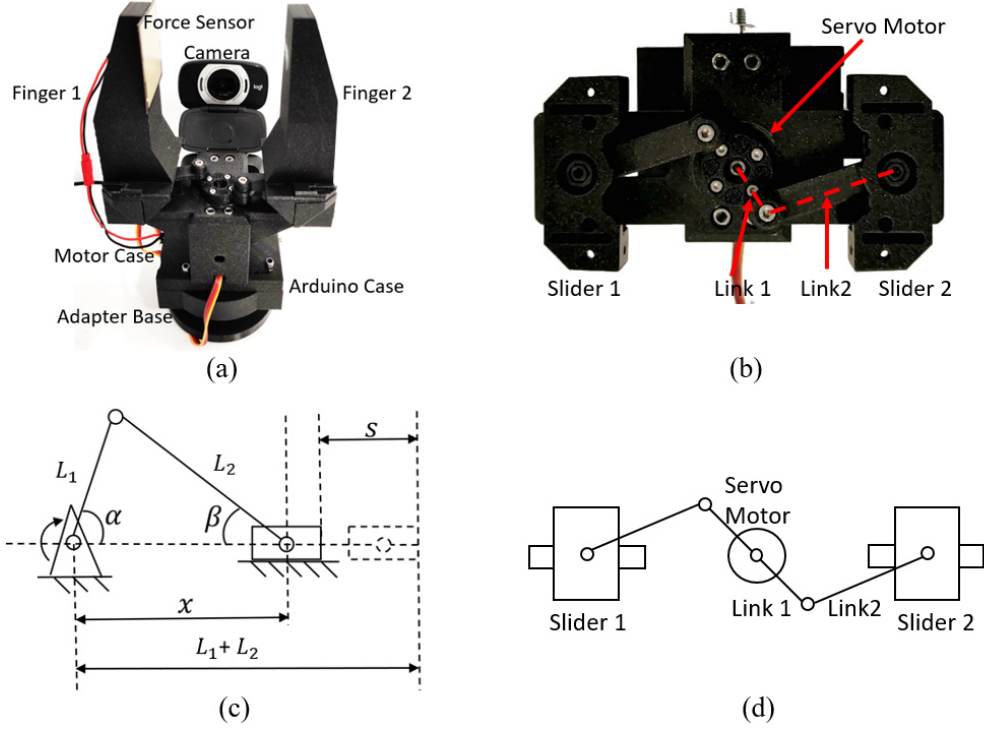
The overall gripper structure and parallel mechanism design. (a) The two fingers of the gripper are mounted on linear slider 1 and slider 2, which are driven by a servo motor. (b) The corresponding view of the slider-crank mechanism with fingers removed. (c) Diagram showing the geometric layout of the slider pin, link pin and motor shaft. The length of the crank is L_1 , the length of the link connecting the finger and crank is L_2 , the motor angle is α and the slider angle is β . (d) Sketch of the in-line slider-crank linkage of the parallel gripper.
